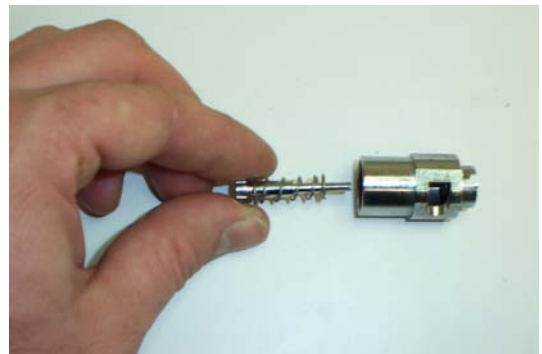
Insert the Inlet Valve and Spring into the Inlet Tube.
